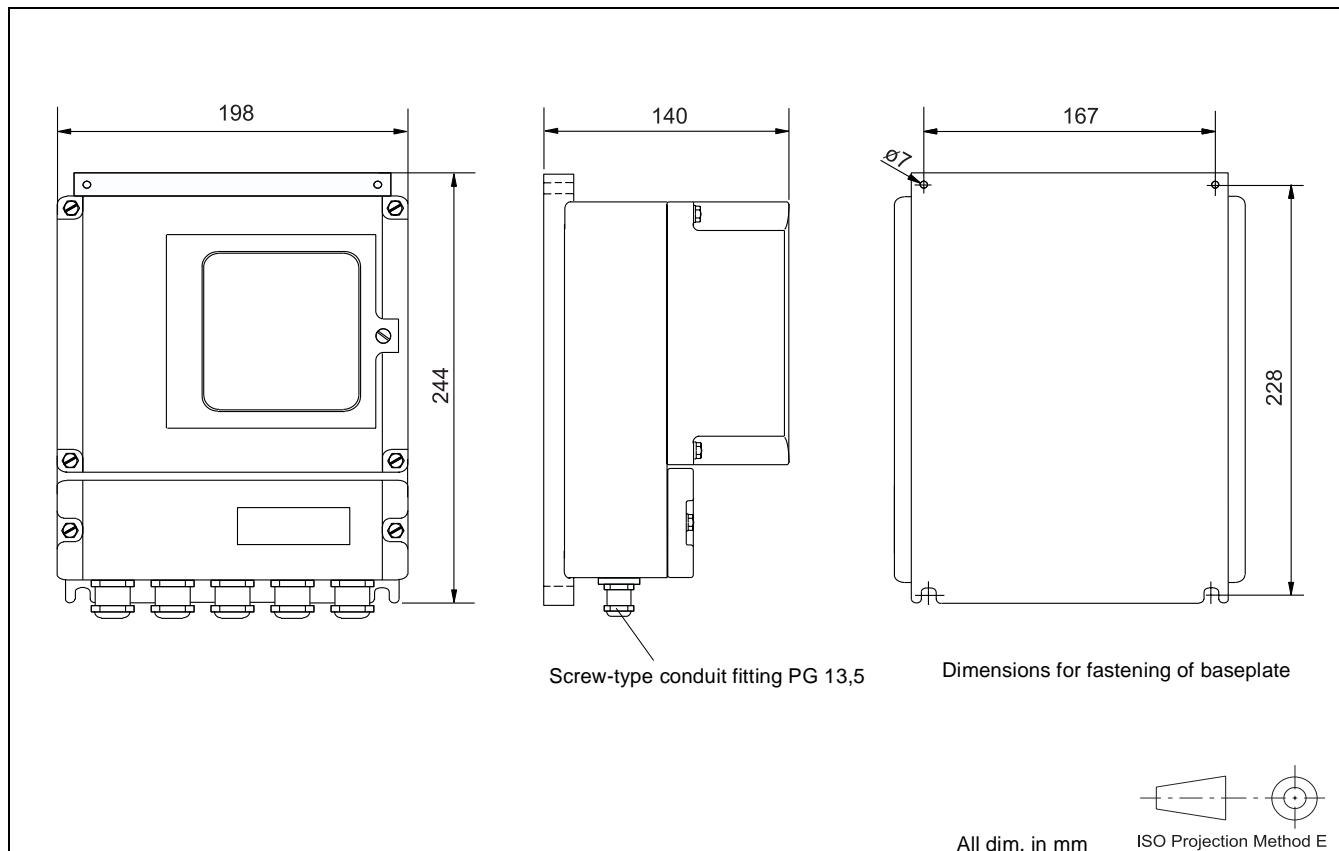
Dimension drawing of field mounted housing for 50VM1000 converter
